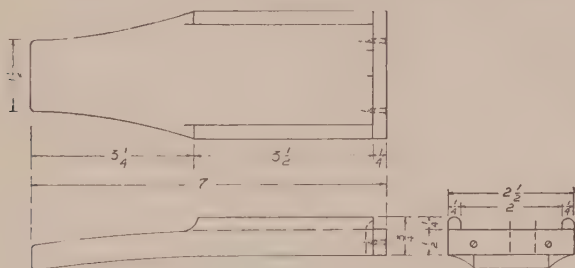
WORKING DRAWING OF HAND STRIPPER AND GAUGE
